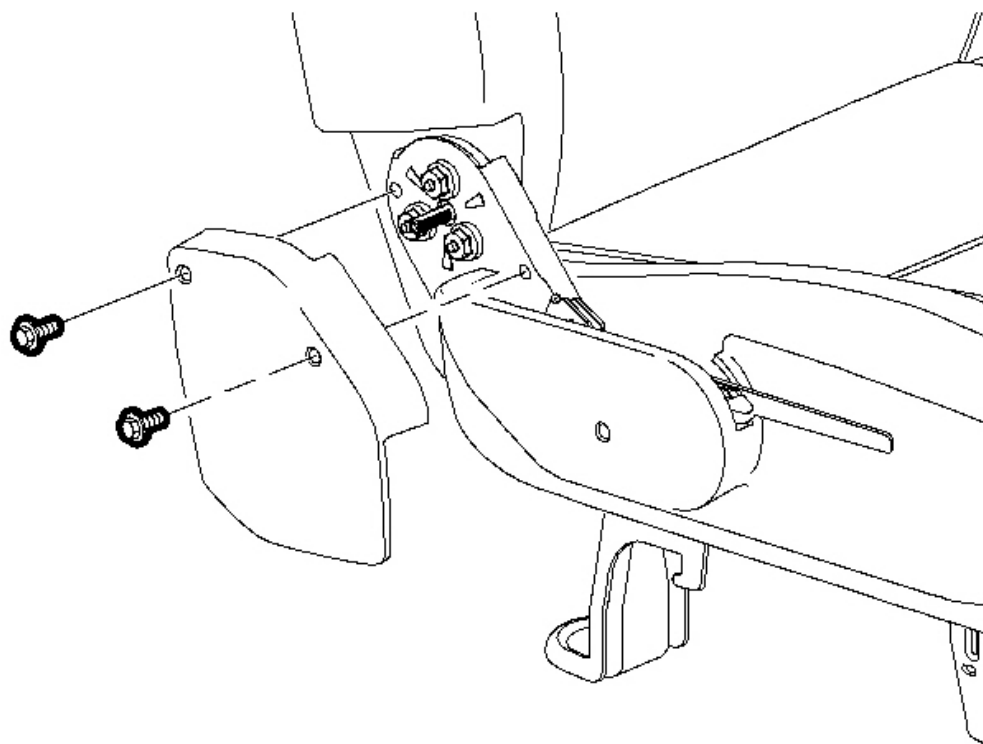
View Of Seat Cushion Outer Trim Panel - Front Seat (2-Way)
